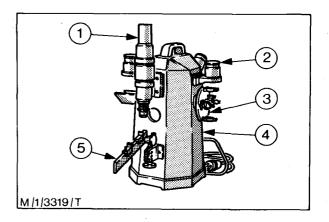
Nozzle Viewer (Tool No. HH 103)
